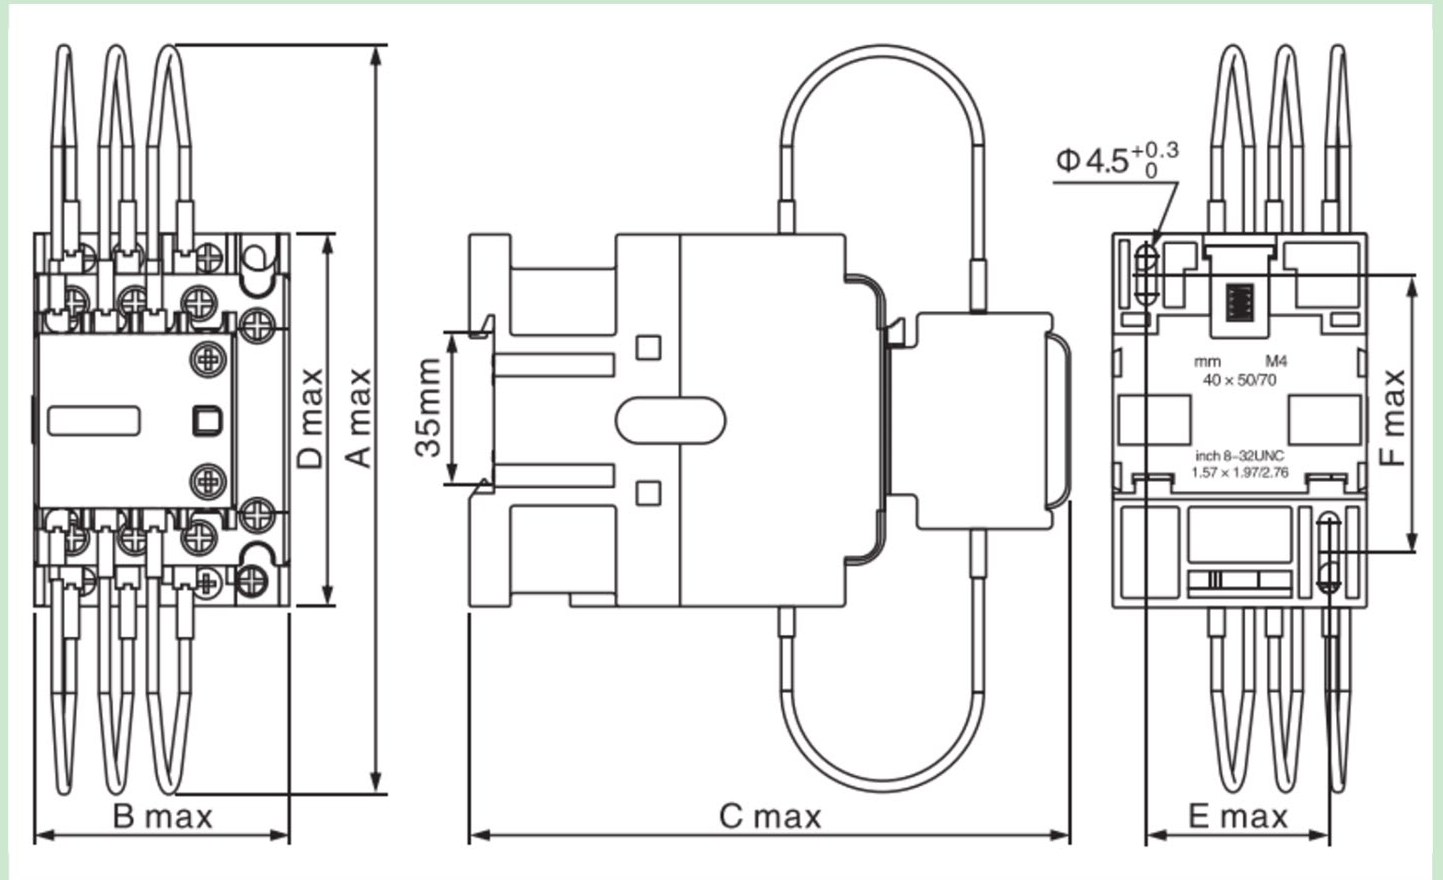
Outline and installation dimensions of CDC19s-25, 32, 43
